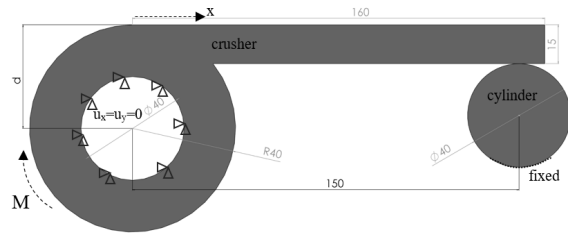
Geometrical model of crusher and cylinder and dimensions (in mm).
